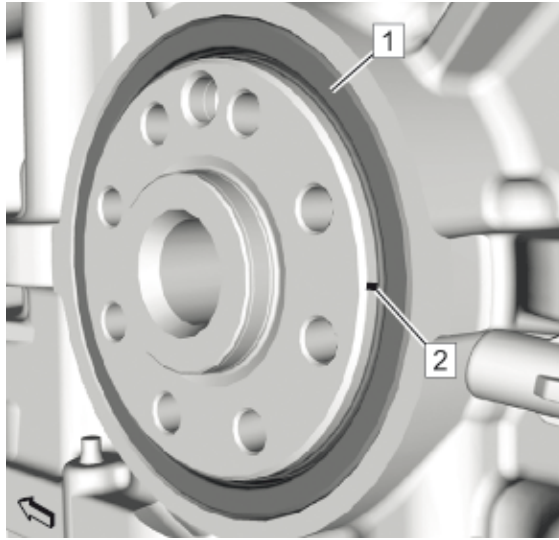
Crankshaft Rear Oil Seal Installed Properly
